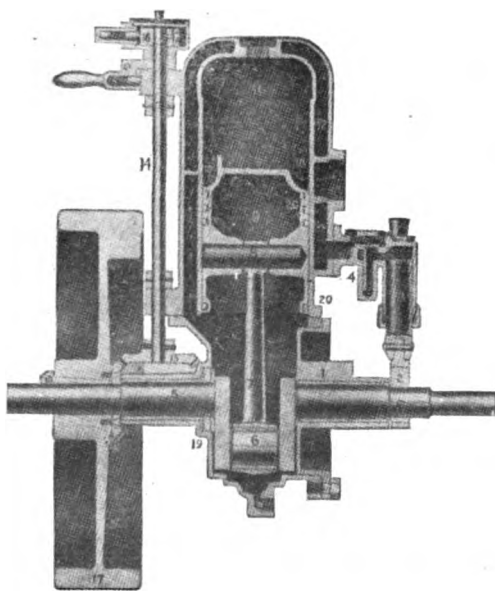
Section of Gasoline Engine, Showing Enclosed Crank.
